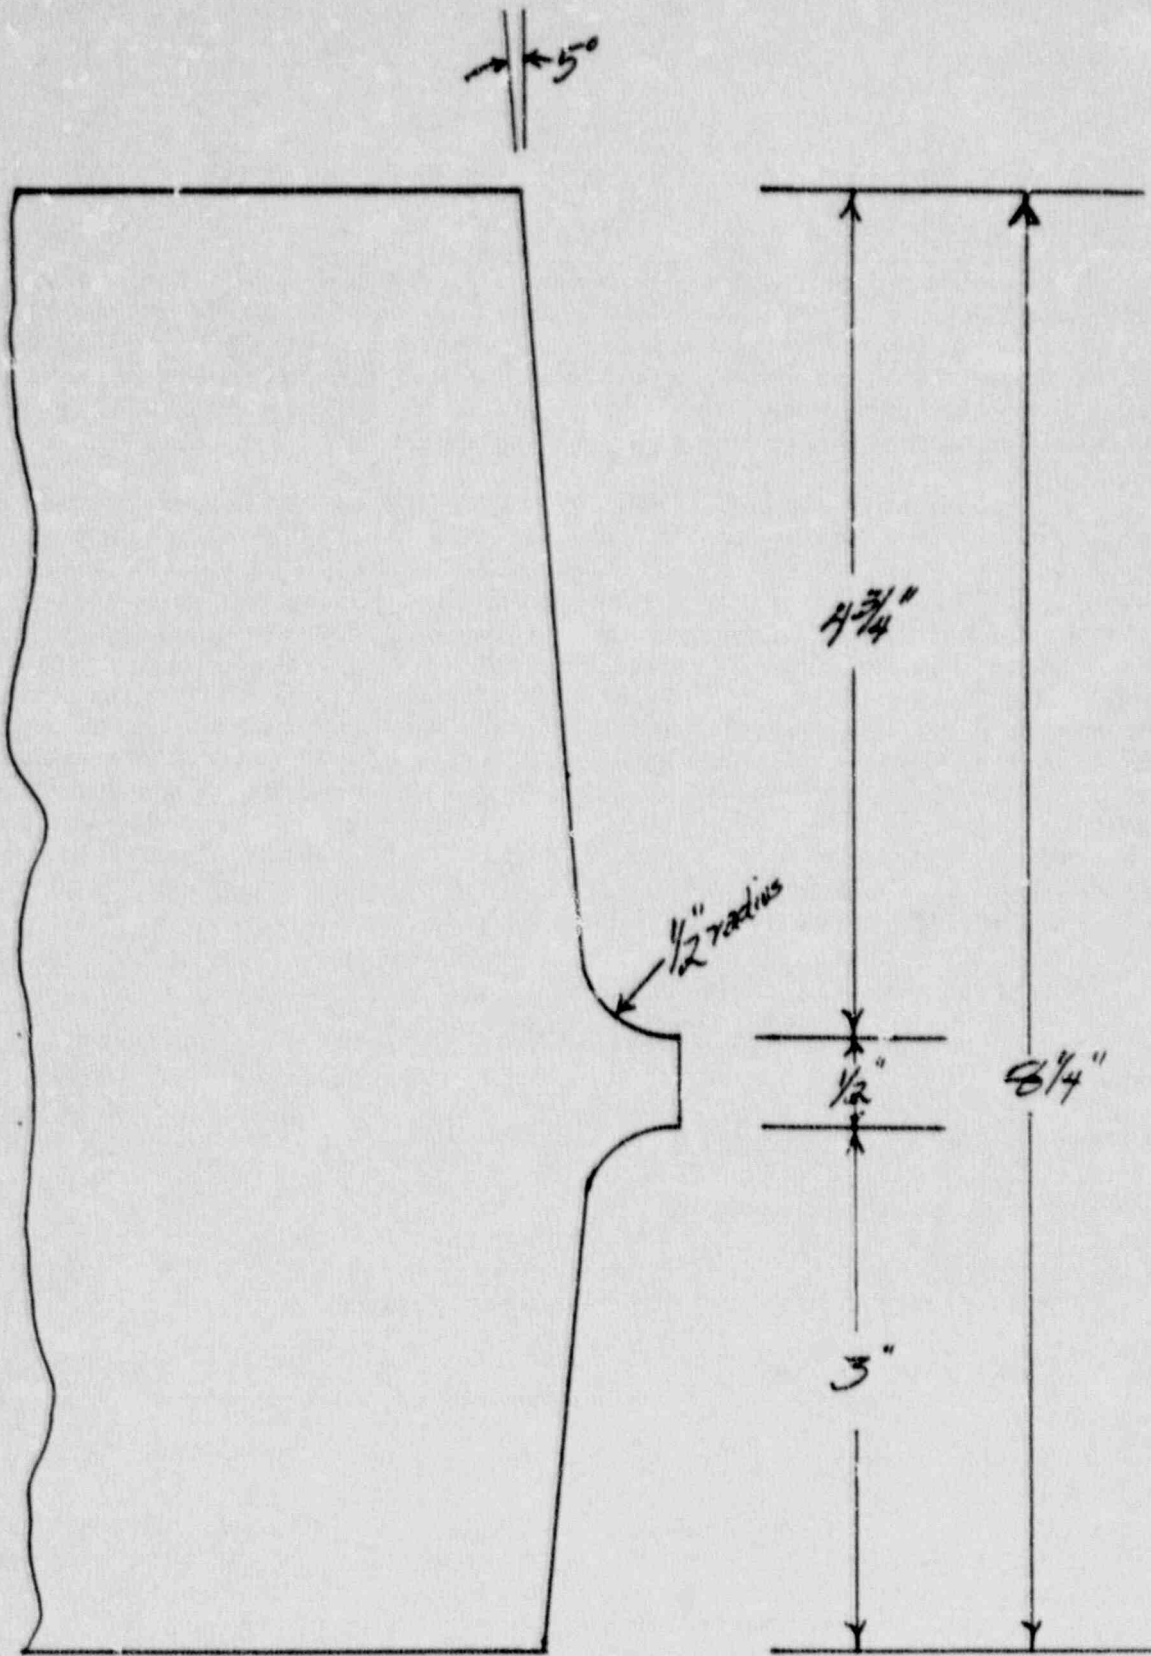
Weld joint design for Welds W8A and W9A
